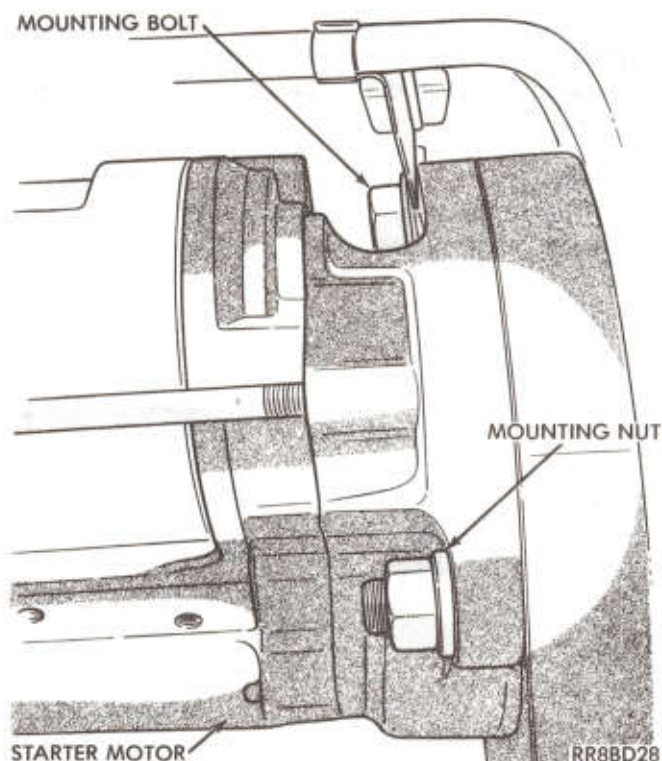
Remove or Install Starter Mounting Bolt and Nut
